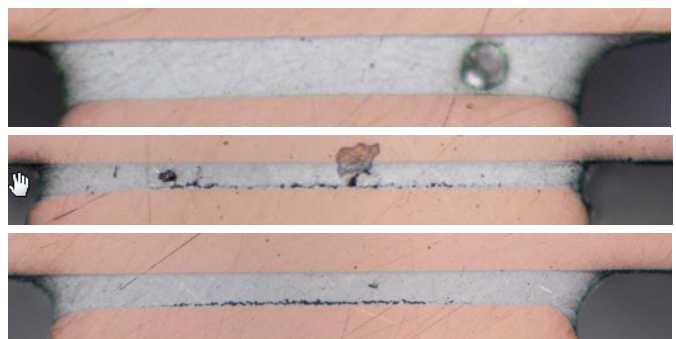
a) Solder joint without Hot Tear b) Solder joint with localized Hot Tear spots c) Solder joint with large area of Hot Tearing
